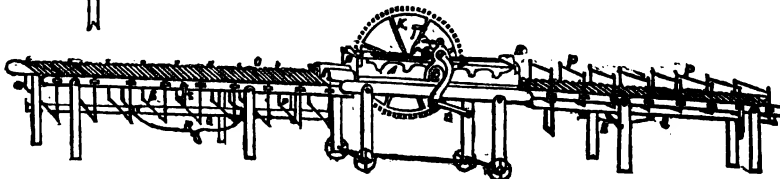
is a perspective view of this machine in its complete state; fig. 2, a longitudinal section of the clay chambers; and fig. 3, a cross section on the line *a b* of fig. 2.
